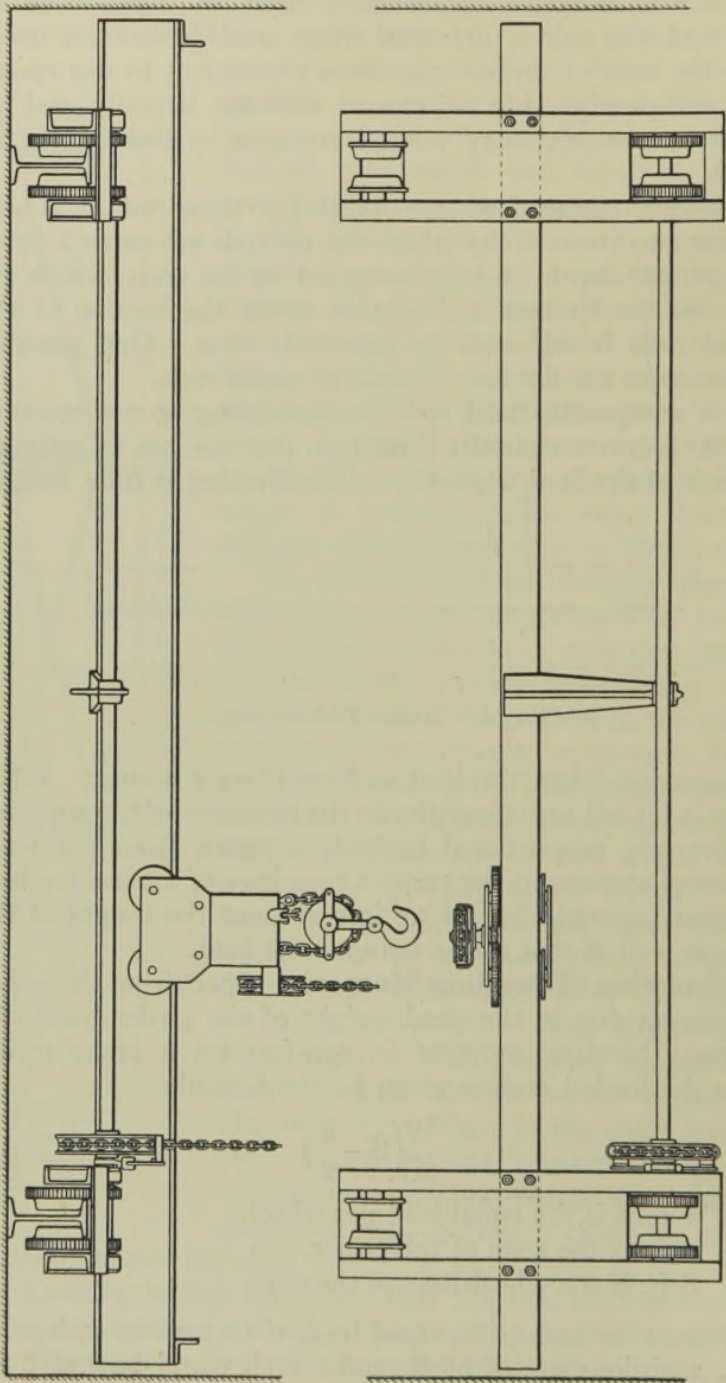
Simple Single-joint Hand Overhead Traveller.
